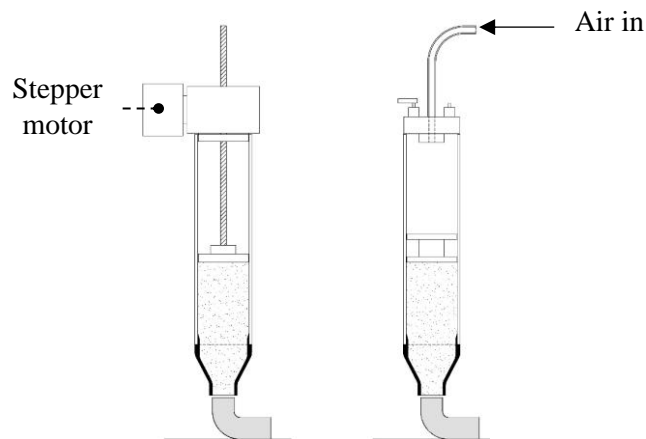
Scheme of the Pneumatic (right) and electromechanical (left) ram extruders.
